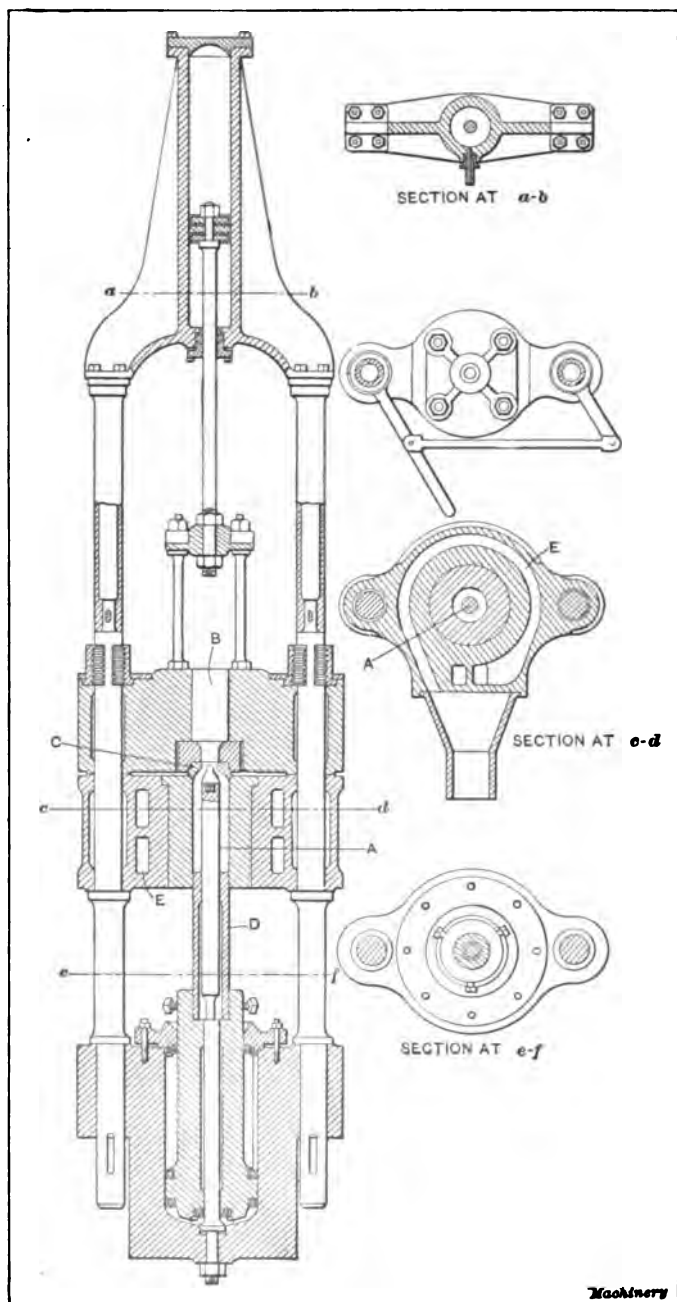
Hydraulic Press for Making Tin-lined Lead Pipe
